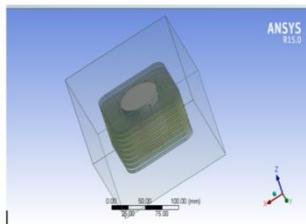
3D geometry of IC engine and enclosure with holes on fins
